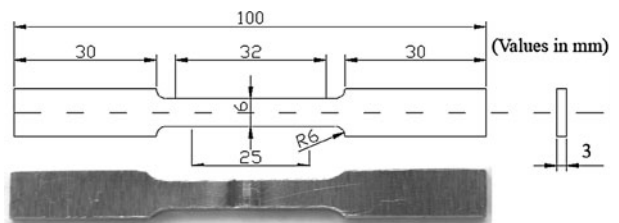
Shape and size of the tensile strength test specimens prepared from welds.
